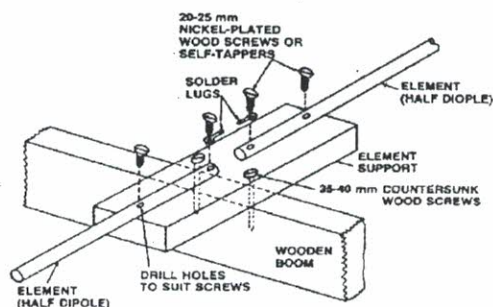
Element-to-boom mounting using wood construction. Estapol or stain all wooden components before assembly.
